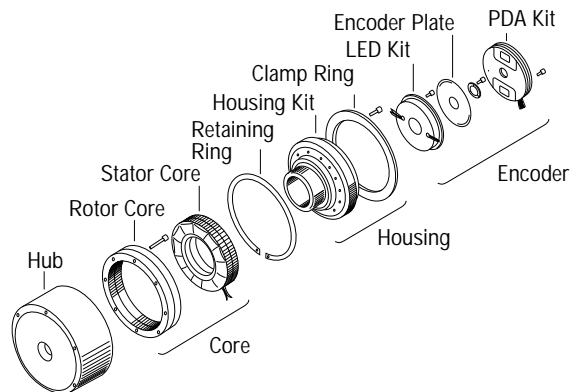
below shows the construction of the Dynaserv DM Series direct drive motor compared to a conventional motor with a gear reducer. The gear reducer relies on large amounts of frictional contact to reduce the speed of the load. This gearing effectively increases torque and resolution but sacrifices speed and accuracy. The direct drive motor is brushless and gearless so it eliminates friction from its power transmission. Since the feedback element is coupled directly to the load, system accuracy and repeatability are greatly increased and backlash is eliminated.
